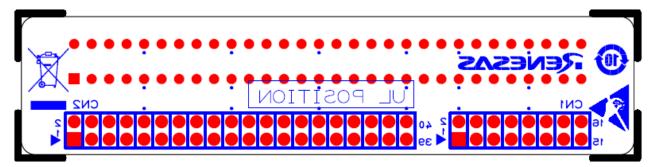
CPU-Electrode relay board: Solder Side Silkscreen
